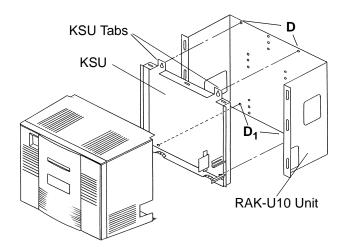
Mounting KSU on the RAK-U10 Unit
